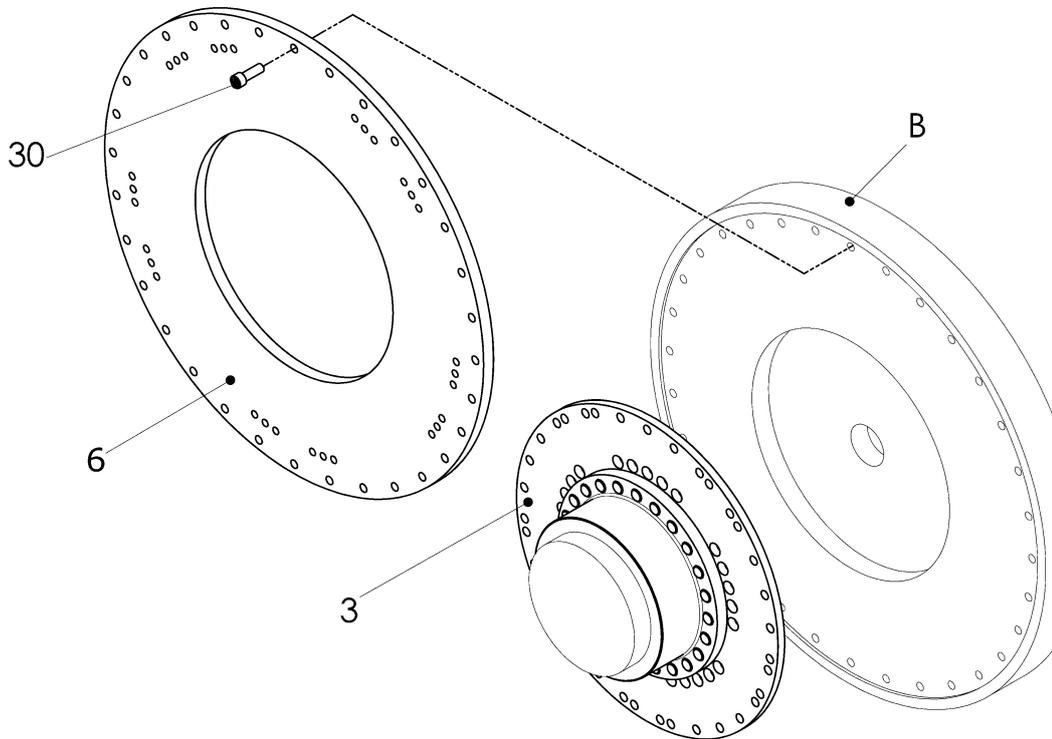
Positioning the adapter (6) to the flywheel (type FS)
